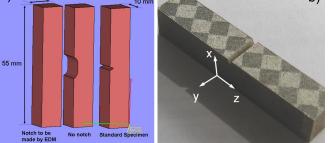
a) Three part designs produced by SLM to be used in Charpy tests b) Orientation of a standard part manufactured with the building axis coinciding x-direction
